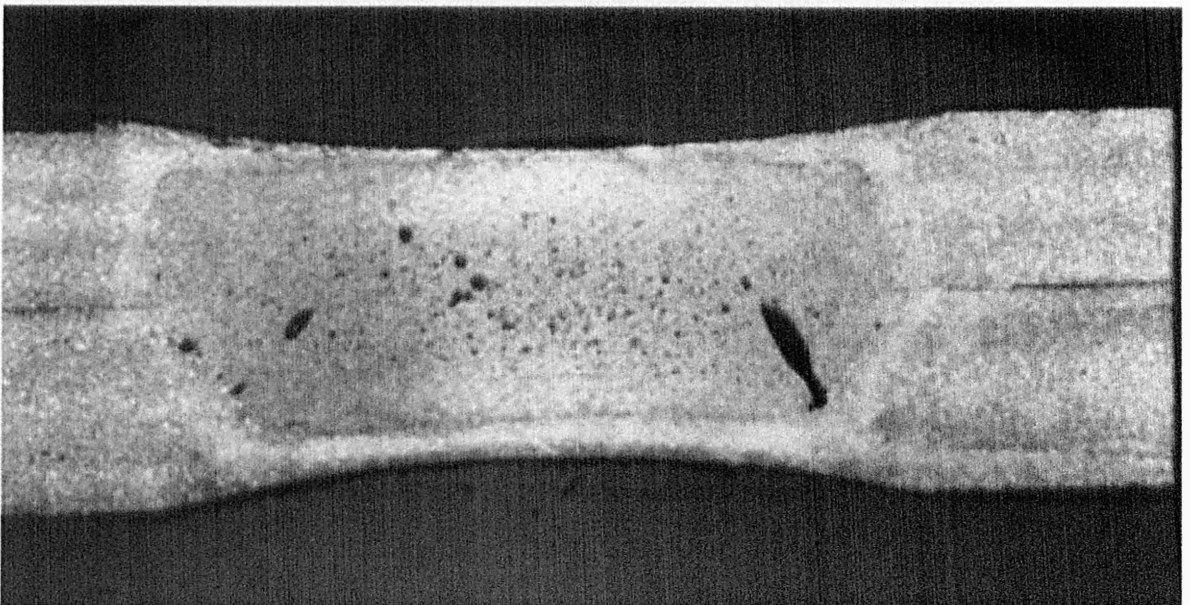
Cross-sectional photograph of a spot-welded joint
